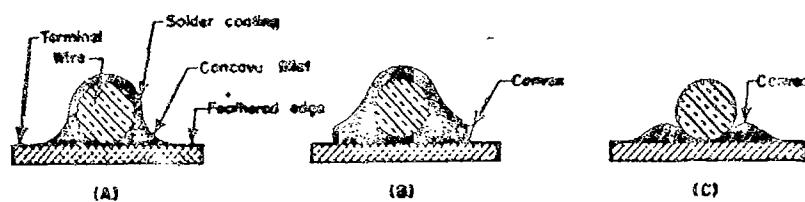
Examples of a good joint (A) and bad joints (B and C).
